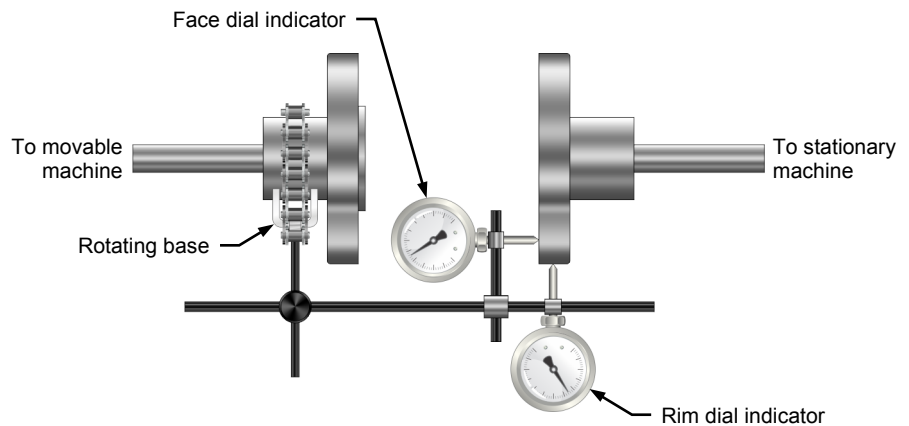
Common arrangement for a shaft alignment using the rim and face method.
